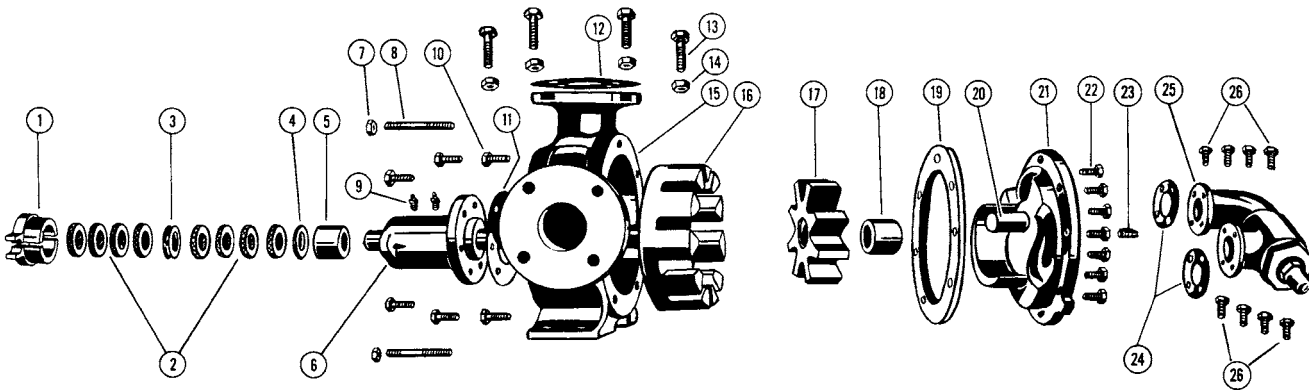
EXPLODED VIEW MODEL LL32 PUMP
